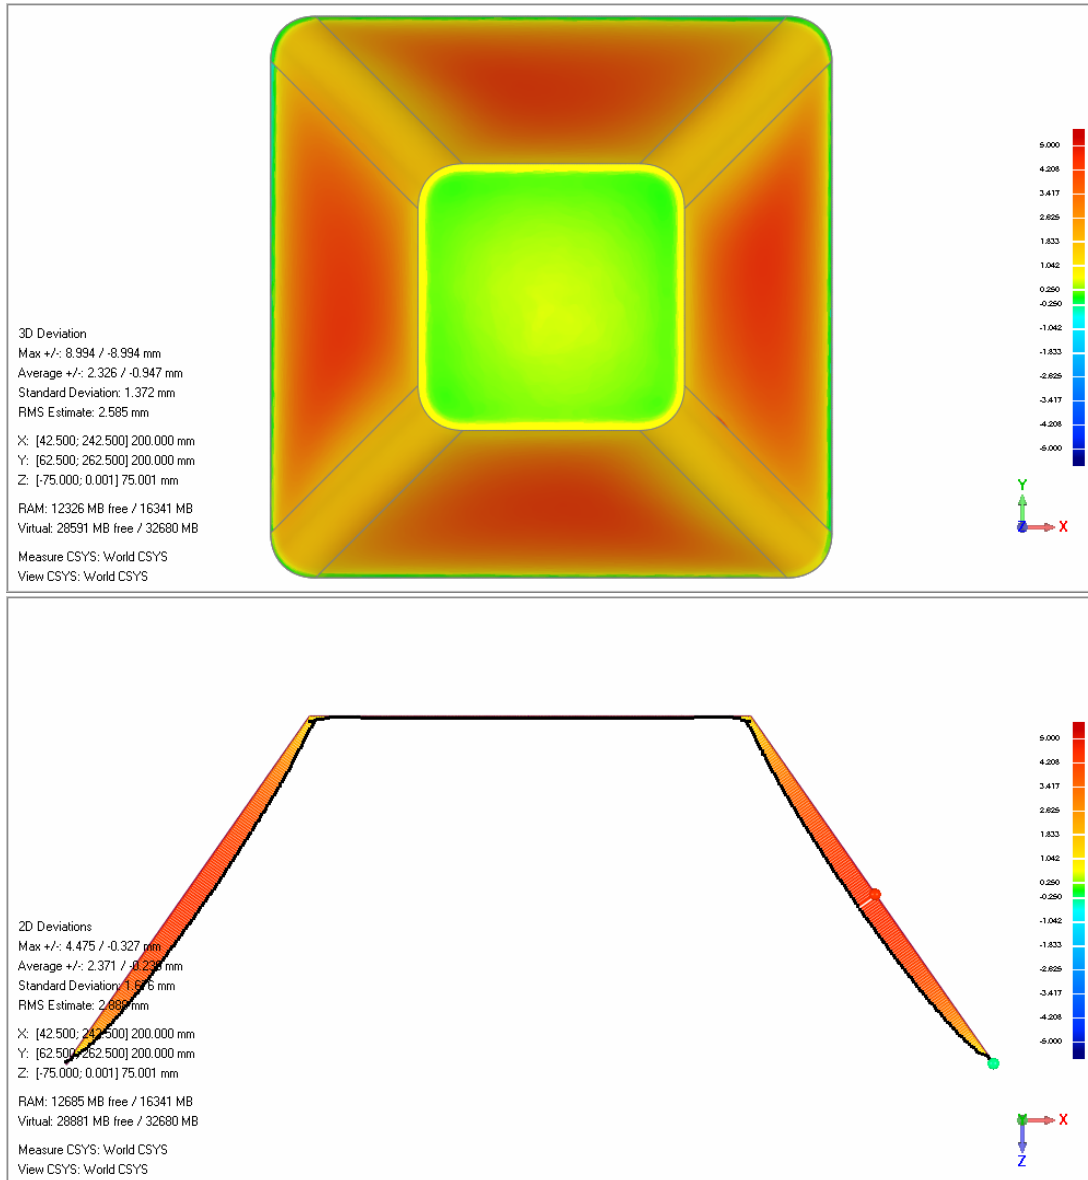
Part T8A geometric accuracy results - top view and cross-section view
